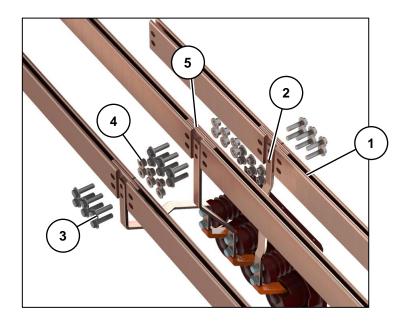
Side view of 1250 A busbar assembly, feeder 400 A
